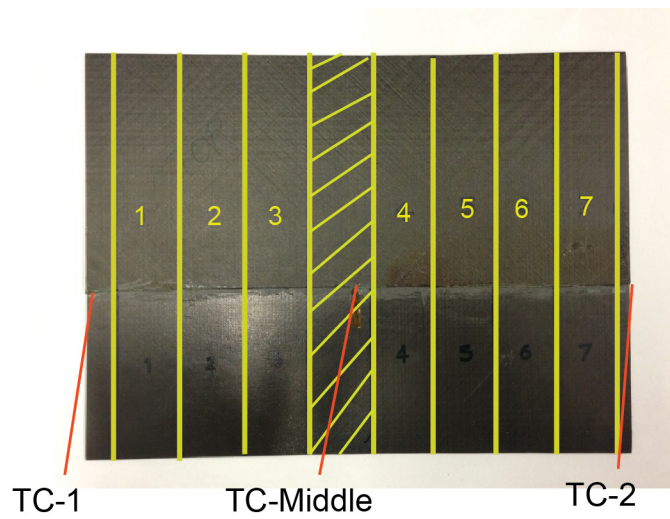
Photograph of cured single lap joint prior to cutting to shear lap specimens.
